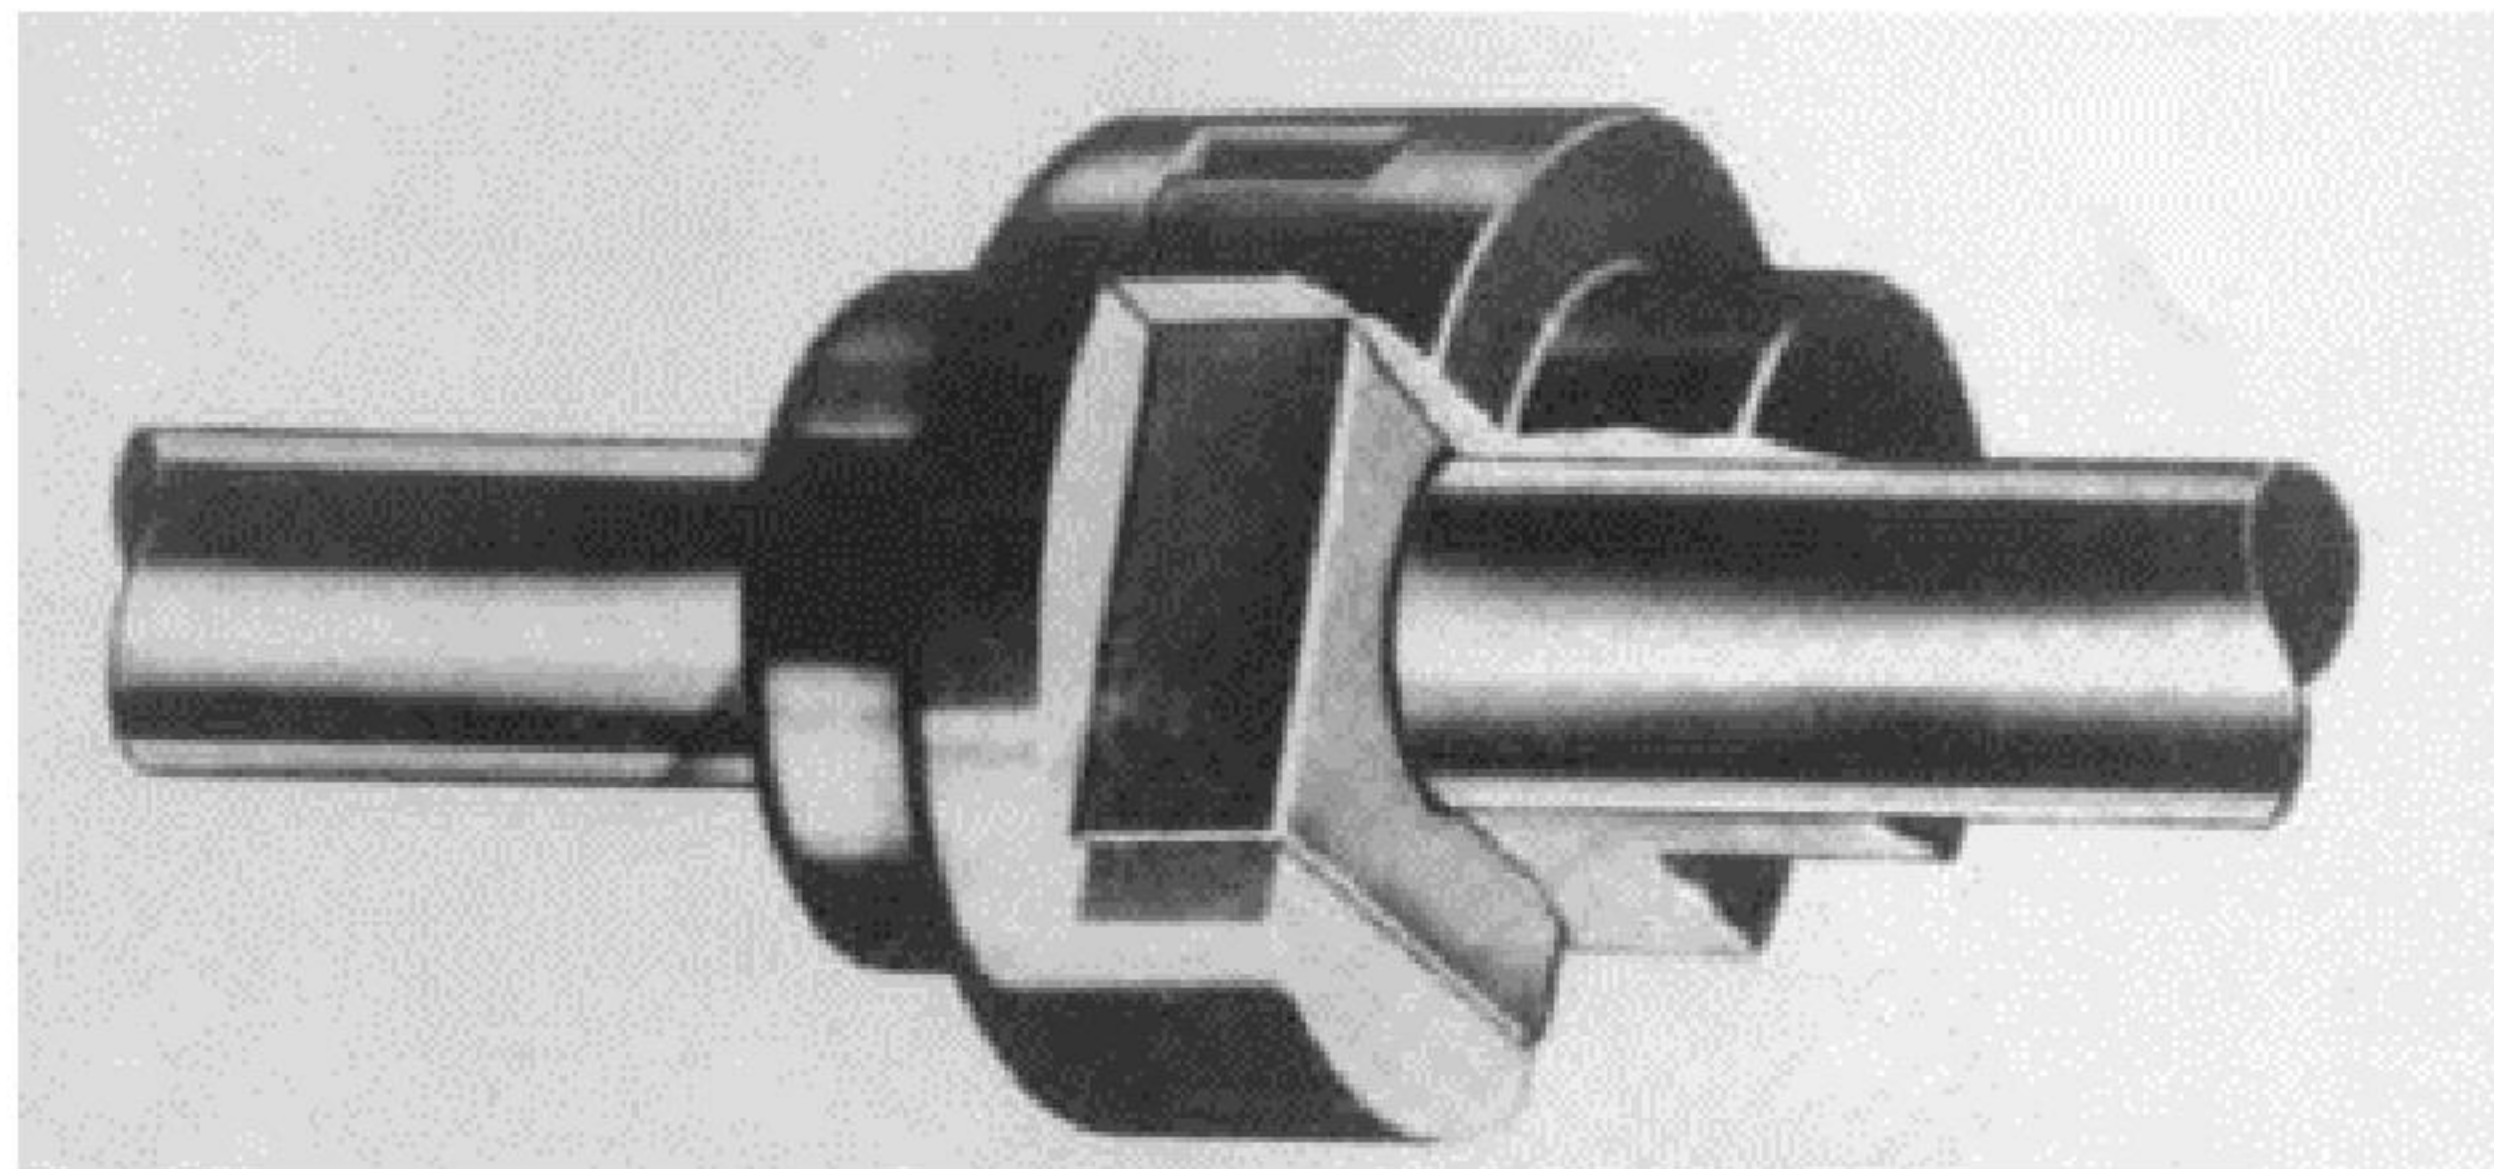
Oldham coupling. (*Zurn Industries, Inc.*)
